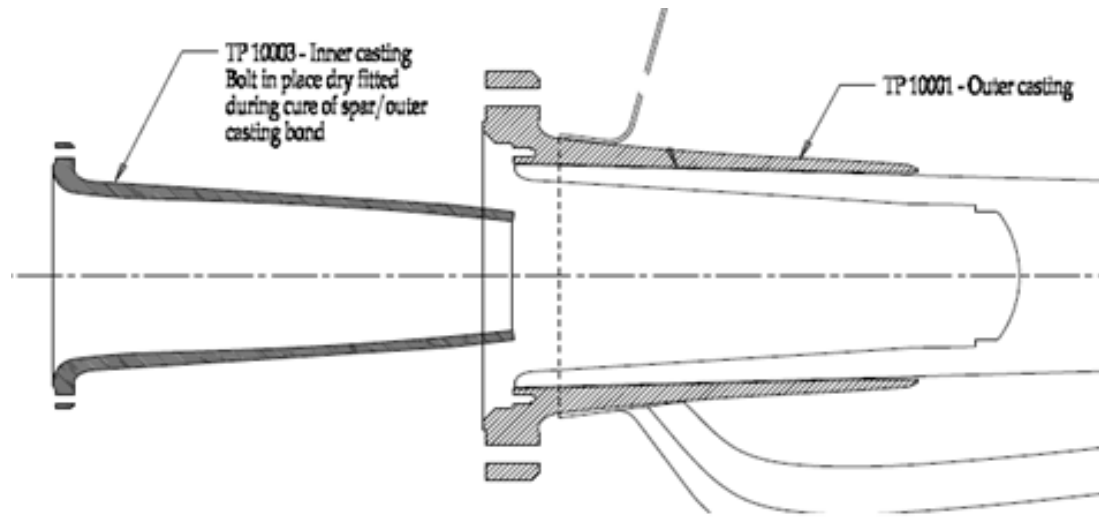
Technical Drawing of Cast Iron Root Insert
